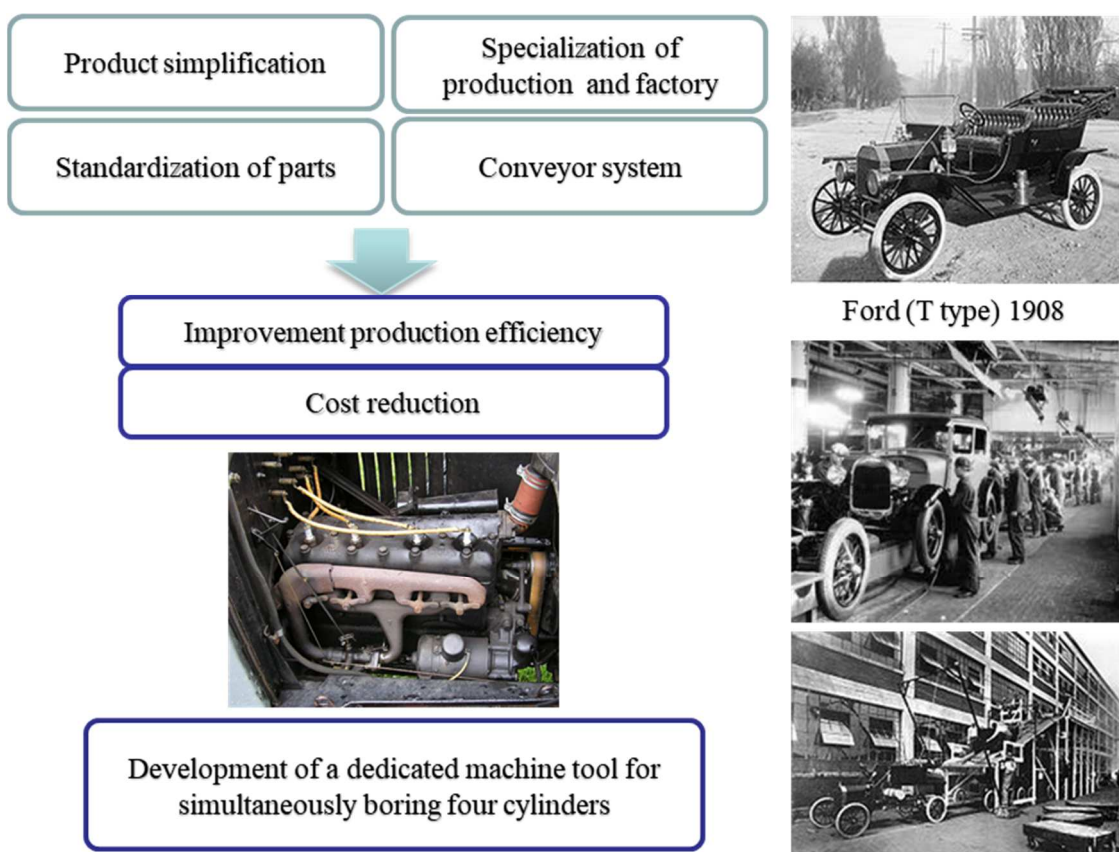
History of machine tools - Mass production society and machine tools -
